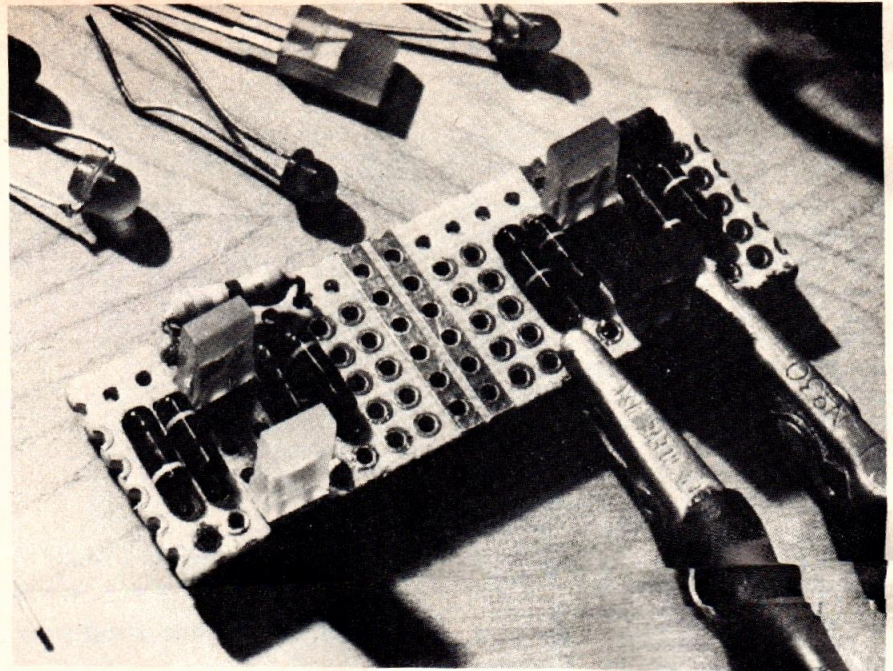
ONE SMALL PIECE of board holds two complete motor-direction indicators. Current-limiting resistor is visible at top-left of board, above LED.
